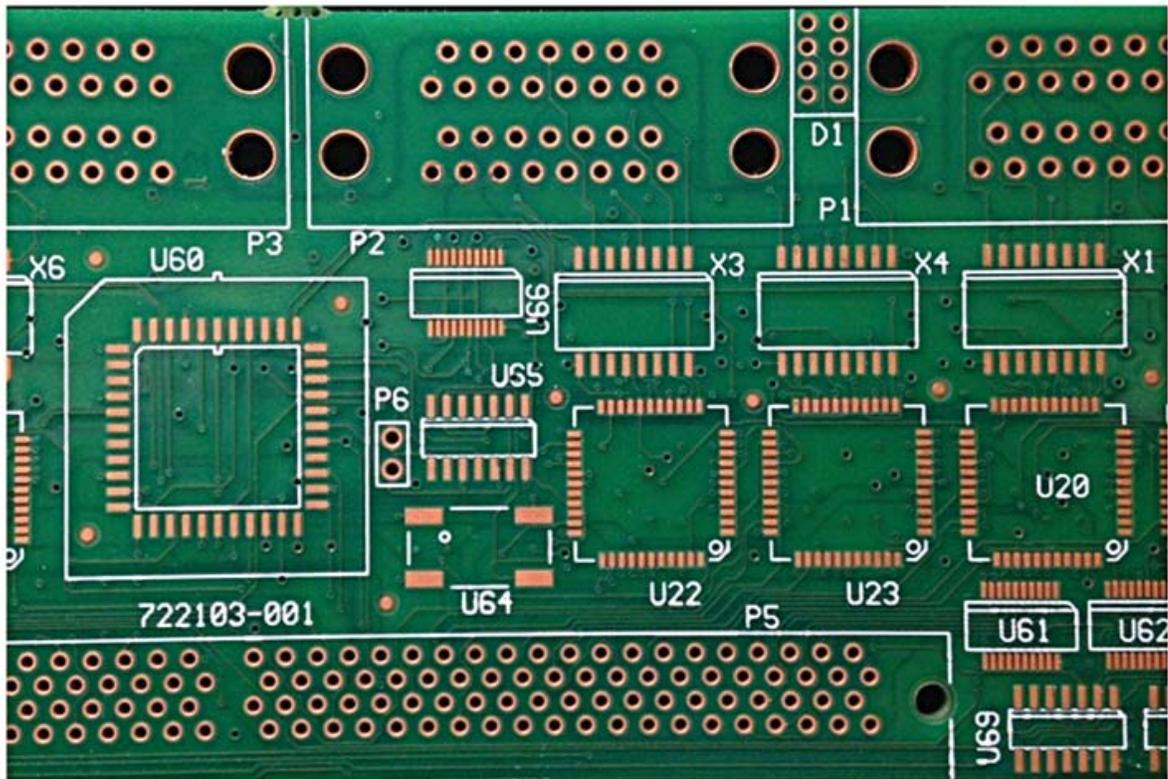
Basic silkscreen for component outline, reference designator, and pin 1 indicator.
